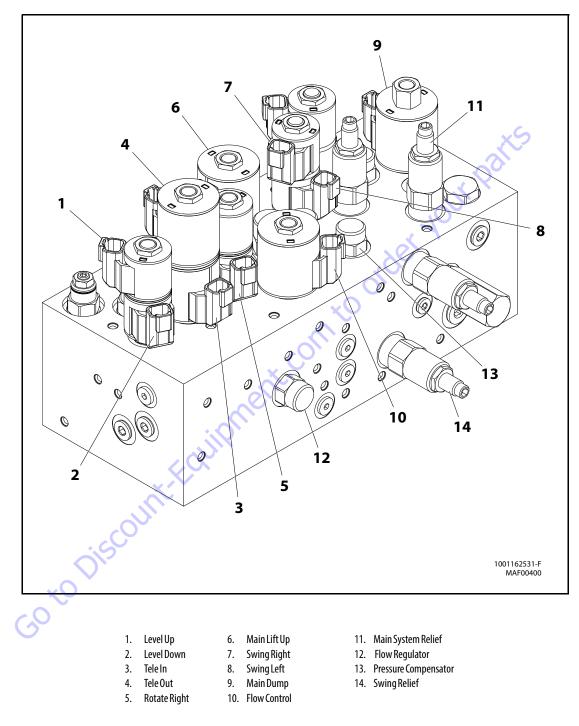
Main Control Valve Identification (400SC) - Sheet 1 of 2
